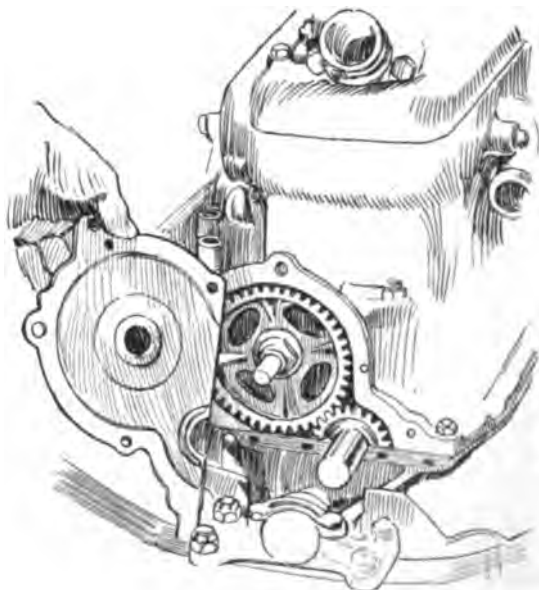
The old gearcover must be replaced with the new one shown in Fig. 144
